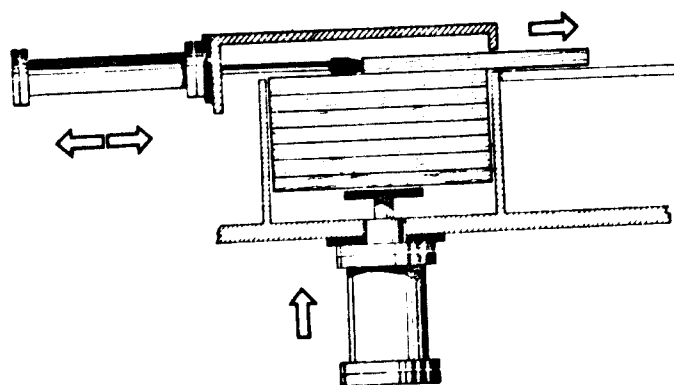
Channel/stack hopper feed out at top or side tensioning and push-out by means of pneumatic cylinders.
